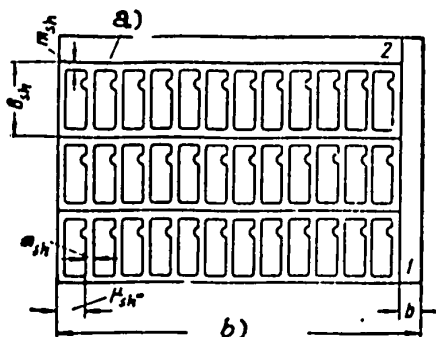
A Typical Cut Up of a Sheet into Strips
